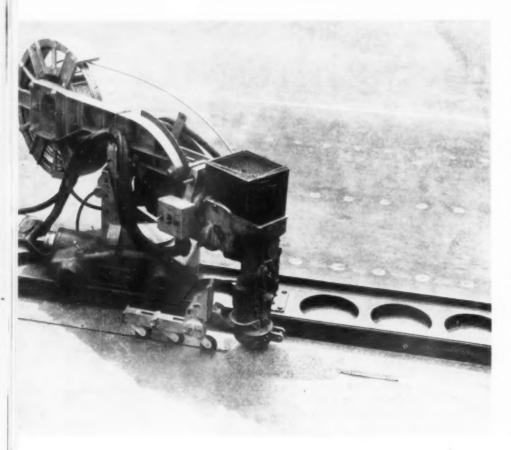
SHOWS THE COMPLETE "UNIONMELT" WELDING UNIT IN THE INTERMEDIATE SIZE, MOUNTED ON A TRACK. KNURLED WHEELS ENGAGE THE TRACK, WEIGHT OF THE UNIT INSURING SUFFICIENT TRACTION FOR ANY RATE OF SPEED DESIRED. AS CAN BE SEEN, THE JOB IS CLEAN AND SELF-CONTAINED, APPLICABLE TO MOST WELDING OPERATIONS WITHOUT IMPROVISING.
